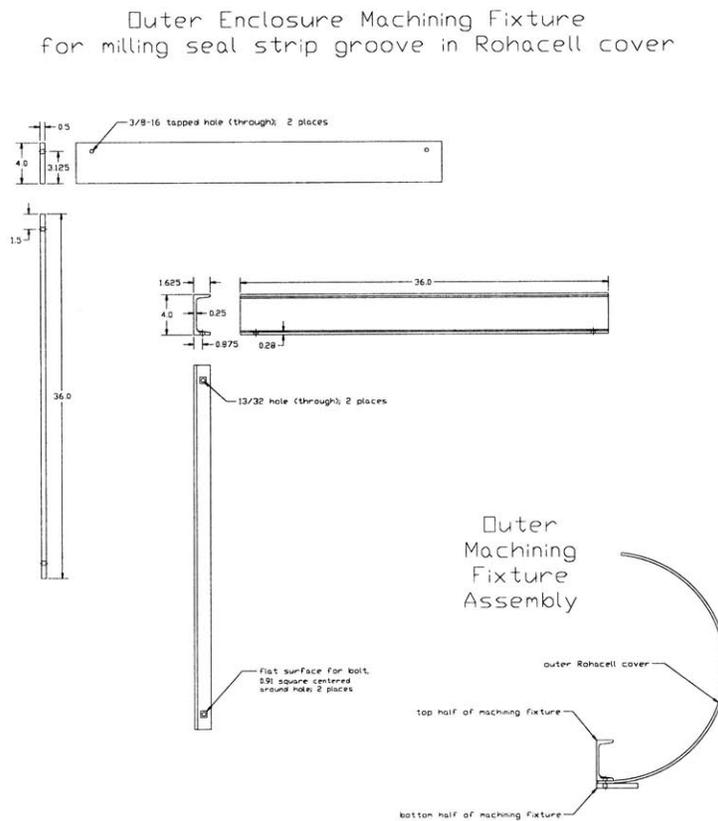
Base plate, top plate (C-beam), and assembly,
